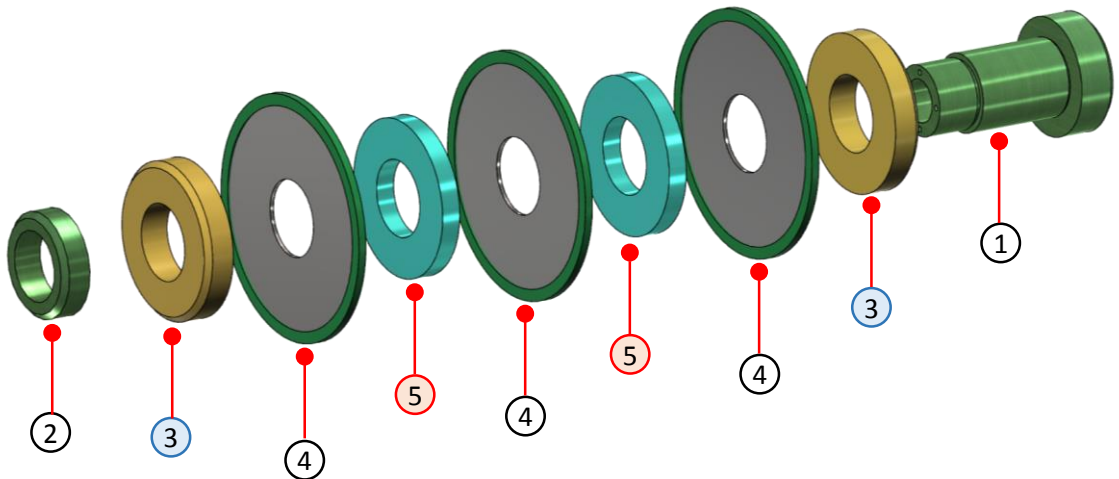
Re-assembly part of a Stack cutting wheel, 3 and 5 are collar and spacer respectively
